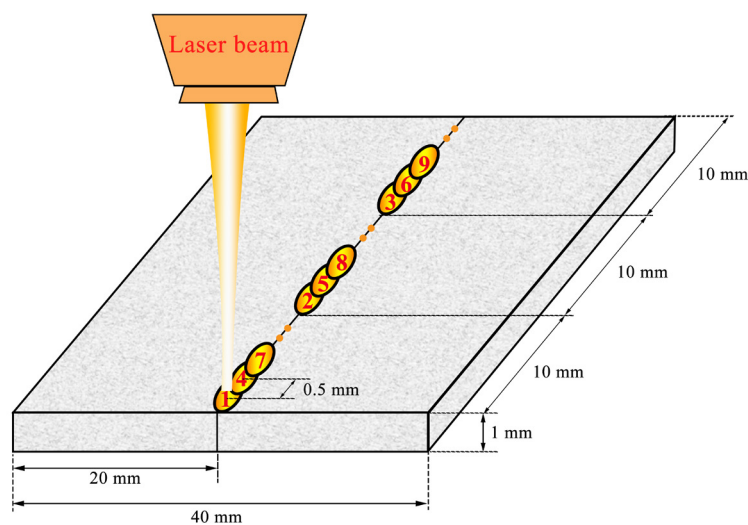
Schematic illustration of pulsed laser beam welding strategies.
